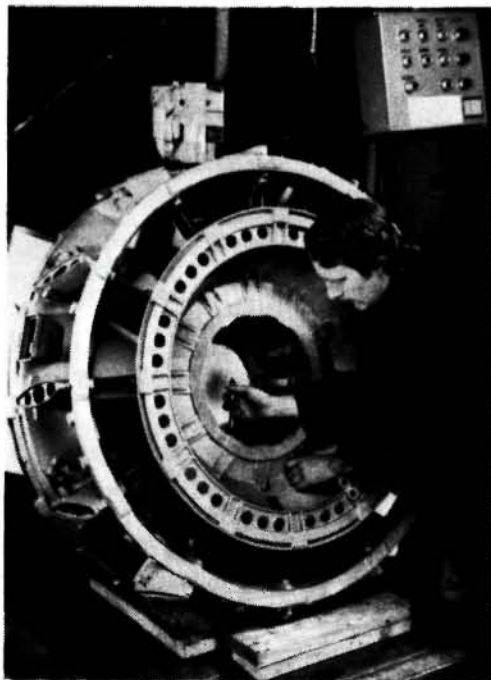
135kg Ti-6Al-4V cast Fan Frame for the General Electric CF6-80C gas turbine engine produced by the investment casting method (courtesy of Precision Castparts Corp.).
